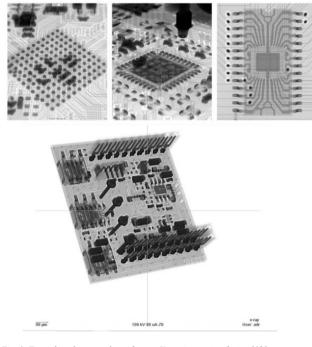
Examples of tests performed on an X-ray inspection device [12]
